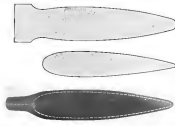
Each hollow steel blade is made of two surfaces. One surface, shown at the top, shows the curved part of the blade to weld on the shock. The other one is the reverse surface, shown in the middle drawing. It is welded in place by a special process. The resulting blade is shown at the bottom drawing in the lower photograph with the welding along the dorsal line. The weld is so perfect, however, that after machine and finishing is done the weld is as smooth as the blade.
